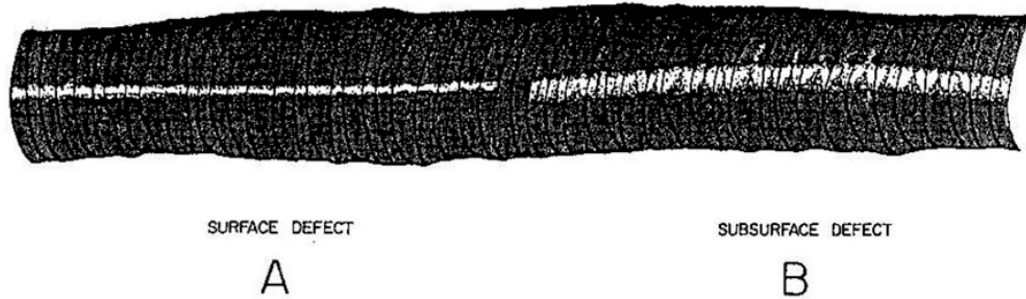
Surface and subsurface indications in a weld.
